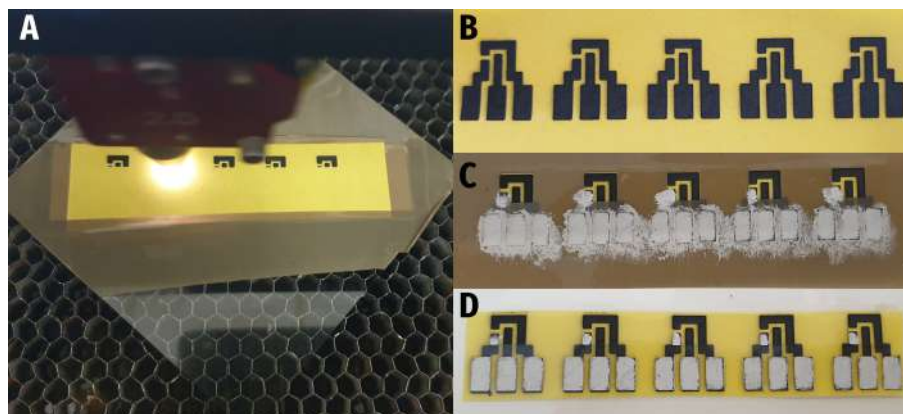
Electrochemical sensors fabrication steps: (a) laser engraving of the LIG electrodes onto the paper substrate; (b) LIG electrodes after the laser process; (c) encapsulated sensors with the silver ink contacts and Ag/AgCl RE established; (d) complete electrochemical sensors after adhesive tape mask removal.
